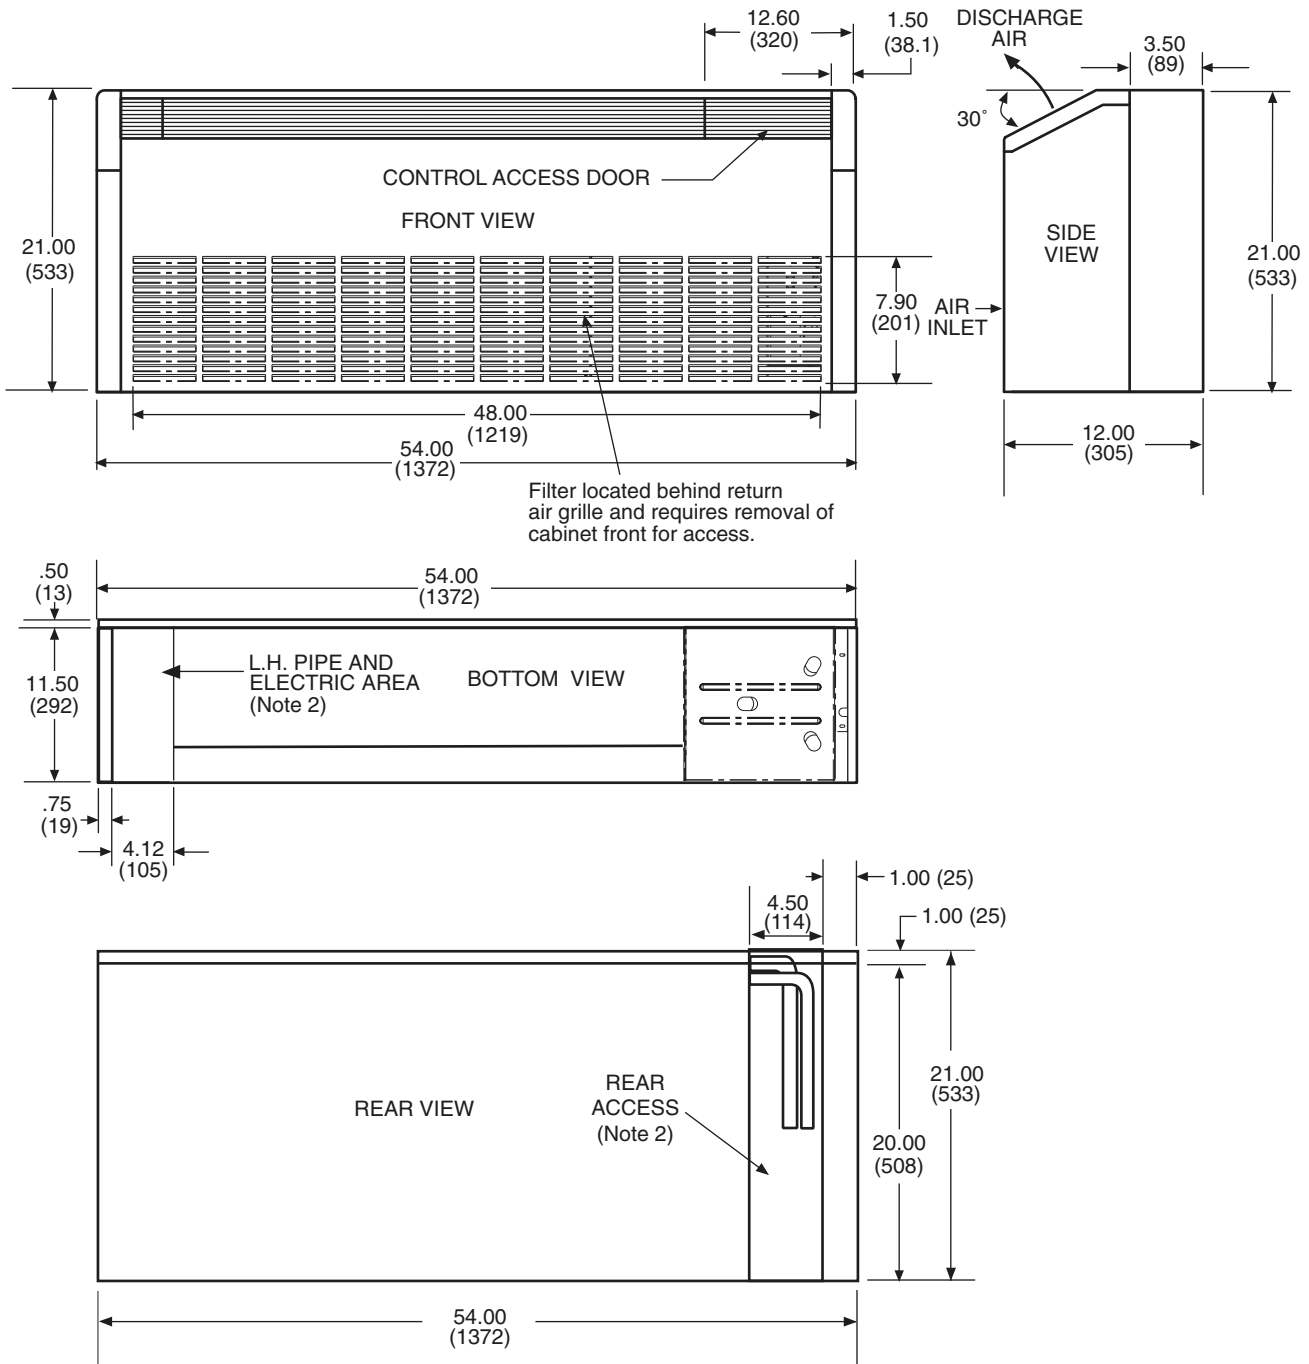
50PEC18 Front Return Cabinet Dimensions — Right Hand Piping
